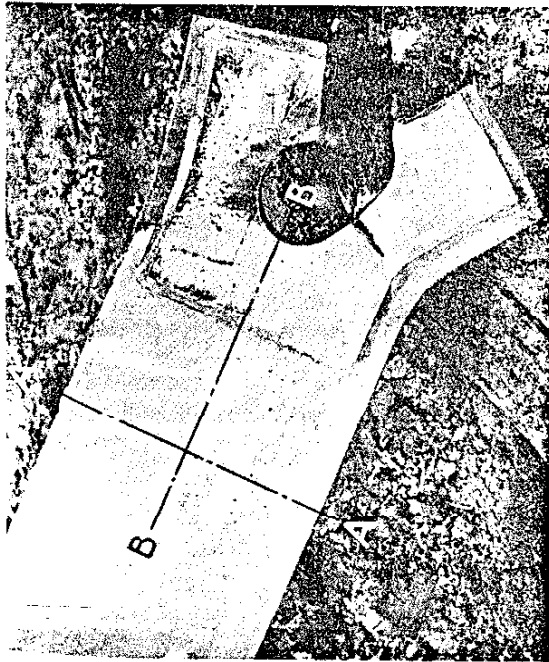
Failure of Jib Tie-Bar of Tower Crane
